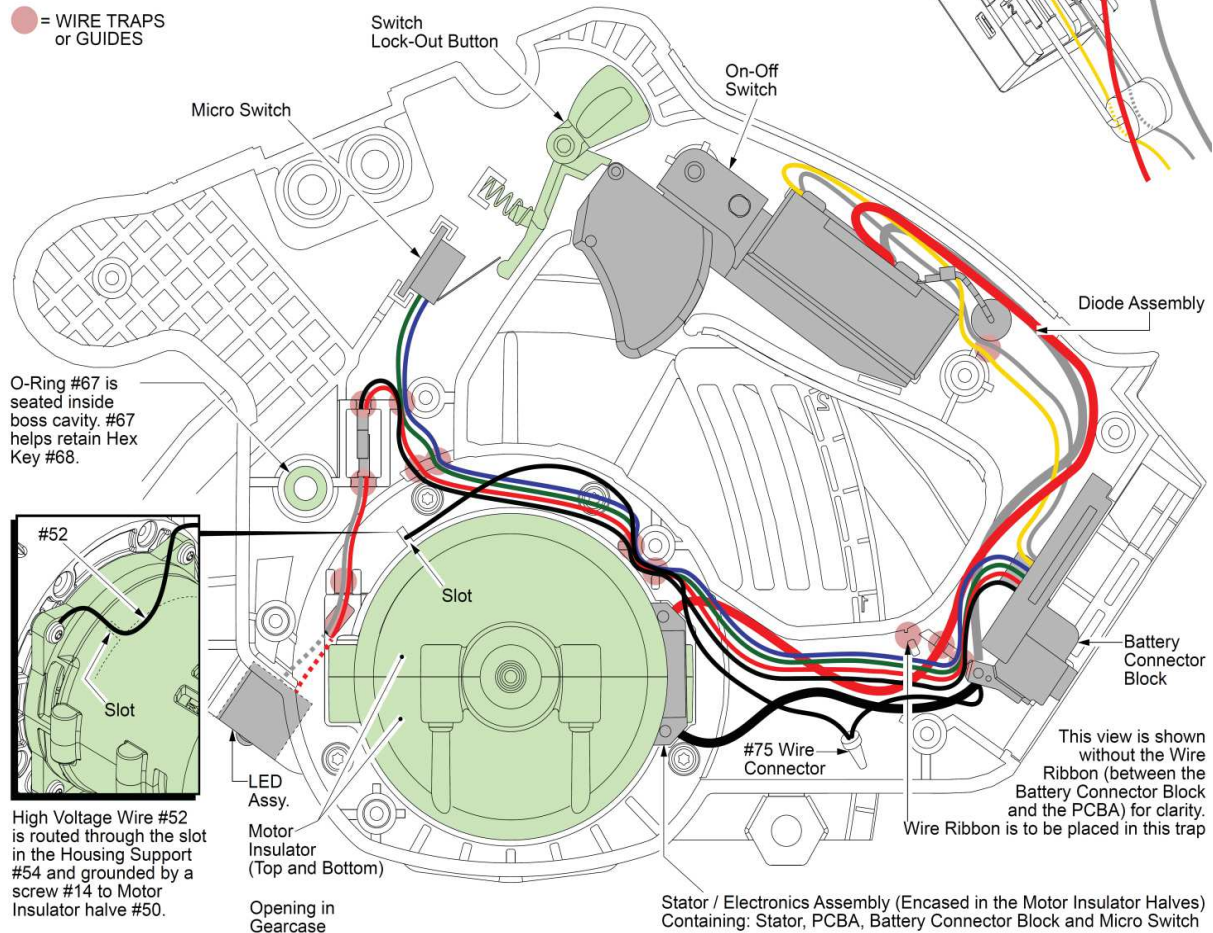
Shown without the Spindle Lock Assembly for clarity.
